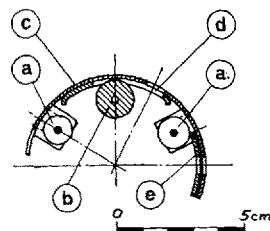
Horizontal cross-section of the Paper-Strip Holder. *a* Split shaft spindles. *b* Rubber disc of the indicator spindle. *c* Tube wall. *d* Sample window with metal guiding frame. *e* Blank window with metal guiding frame.
